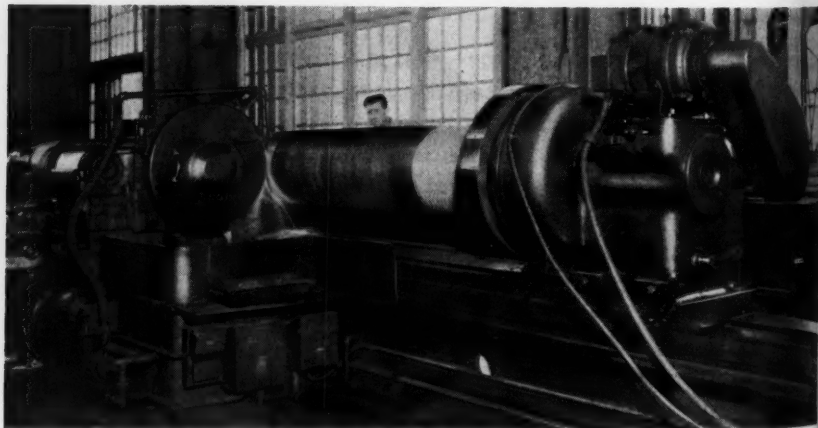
Grinding bearing diameters on columns for a 3,500-ton hydraulic press. The machine is a 30-in. x 24-ft. cylindrical grinder
